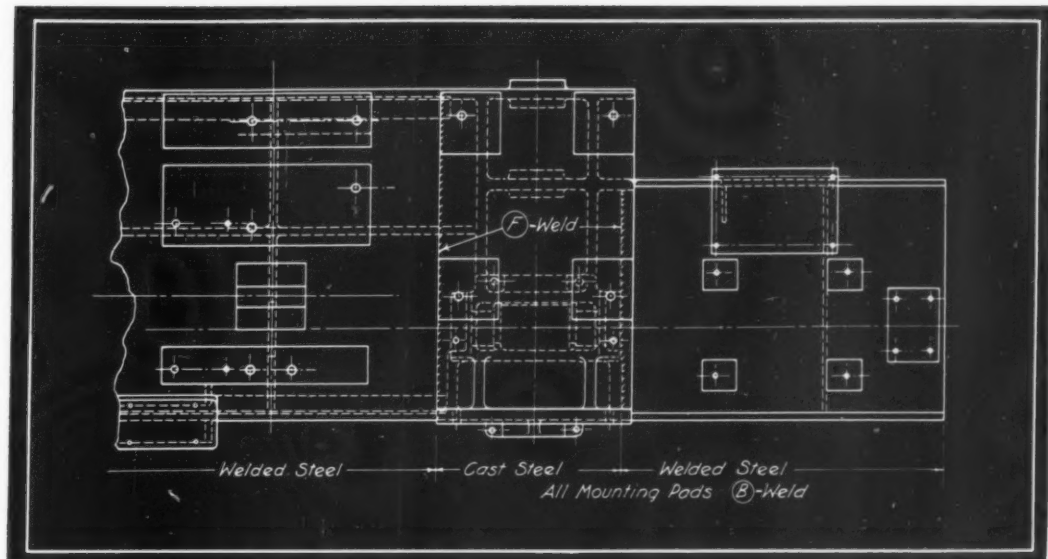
Top rail of special Cincinnati Hydromatic, also shown in Fig. 3, is fabricated by welding
